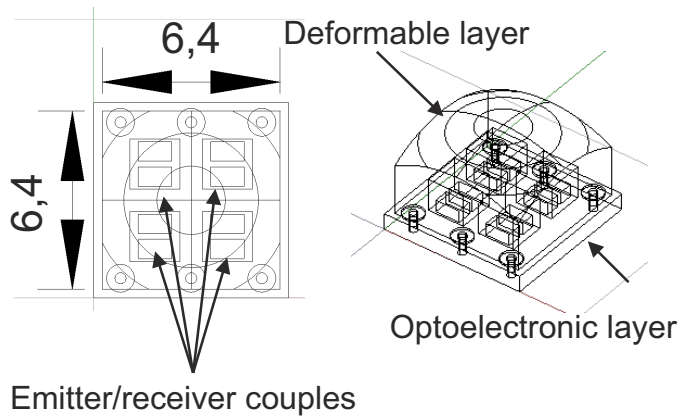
CAD model of a sensing module prototype: top view on left (dimensions are in mm) and perspective view on right.
